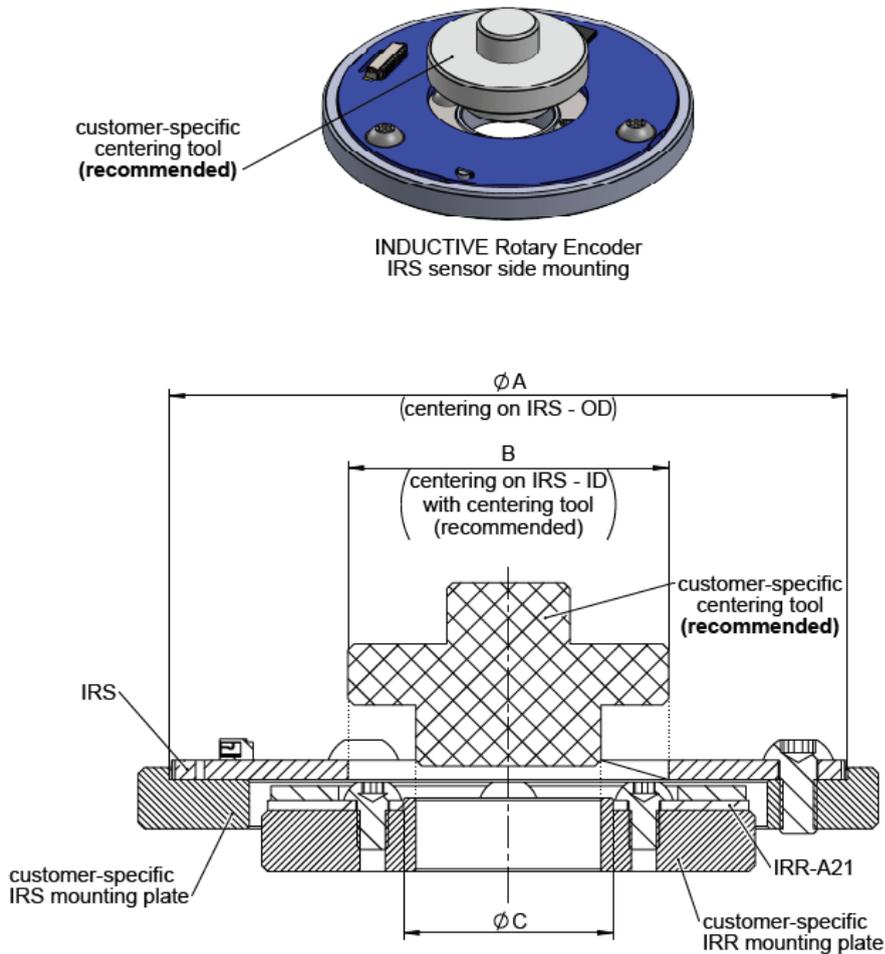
INDUCTIVE Rotary Encoder: IRS sensor-side mounting and centering.
